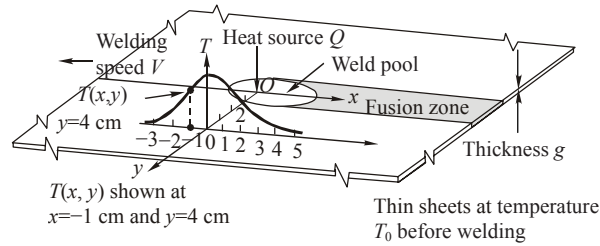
2D heat flow during butt-welding of two thin plates
